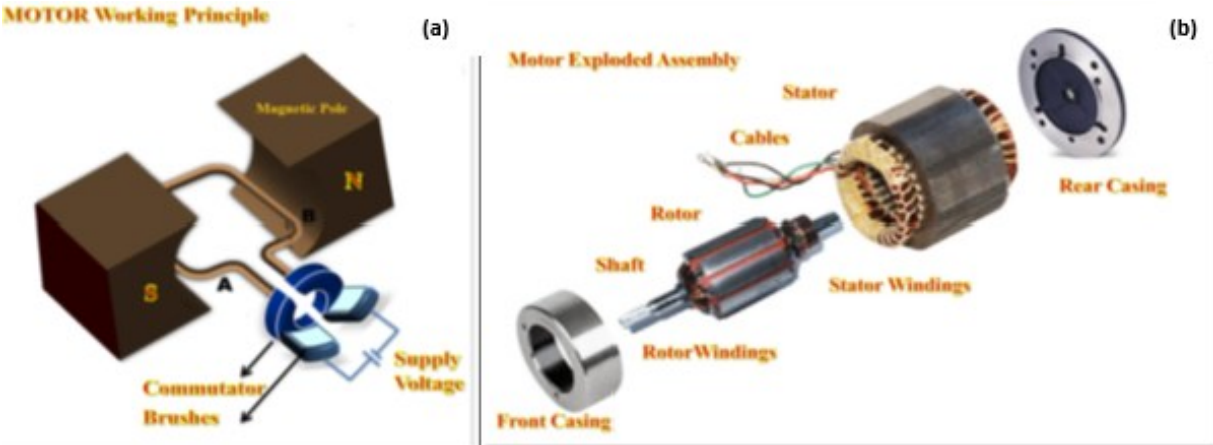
a) Electric Motor Working Principle [10], b) Electric Motor and Its Assembly [10]
